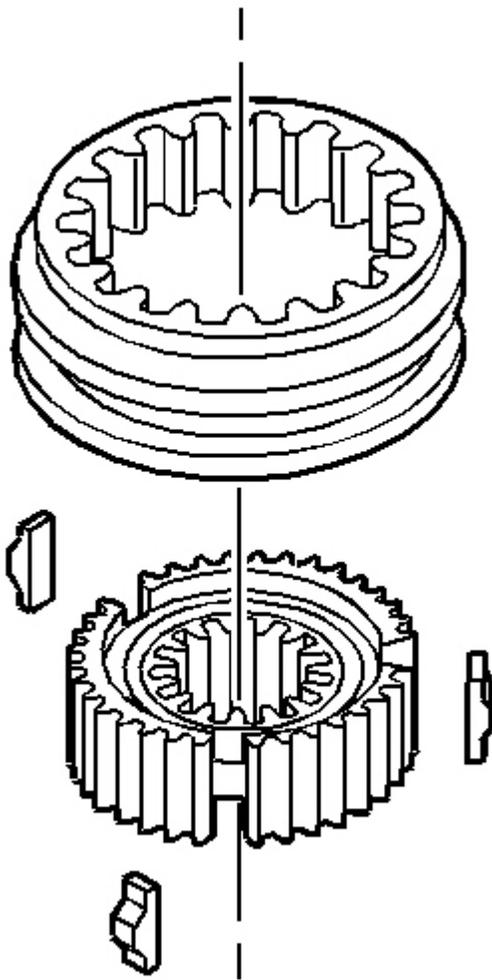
Installing/Removing Synchronizer Sleeve & Keys On Hub
